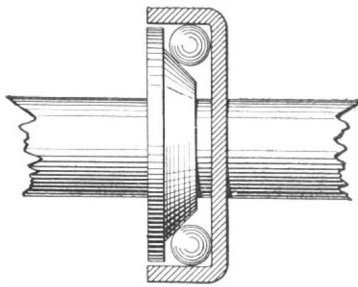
SECTION THROUGH ORDINARY BALL BEARING.
